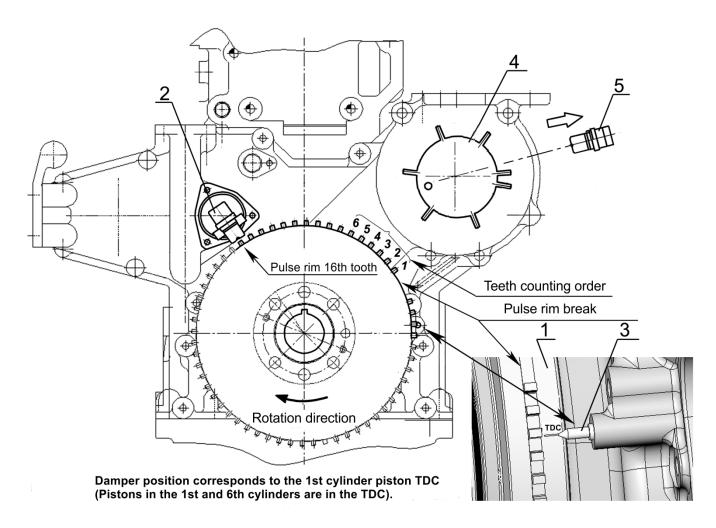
Device for fixing the fuel priming pump drive gear pulse rim
